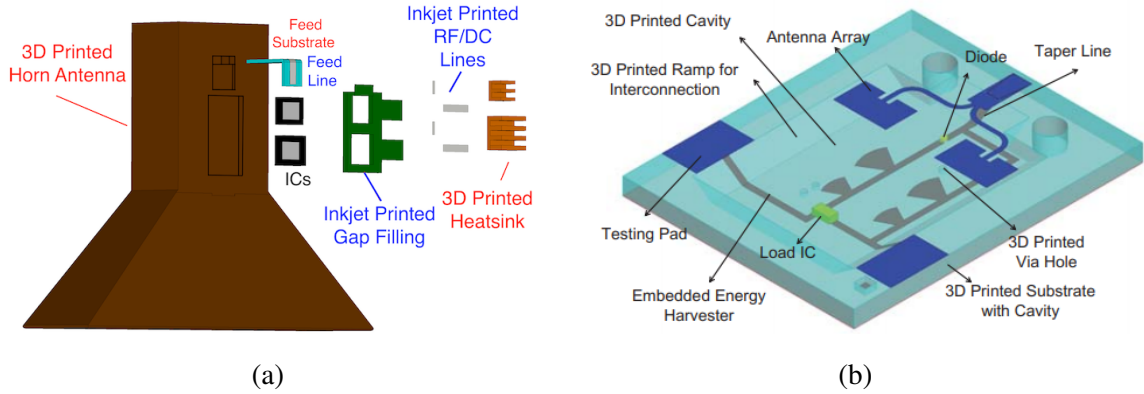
Additively manufactured SoA and SoP: (a) Exploded view of the of a SoA proof-of-concept topology, with the various components required [60]. (b) Flexible system demonstrated layer by layer [61].
